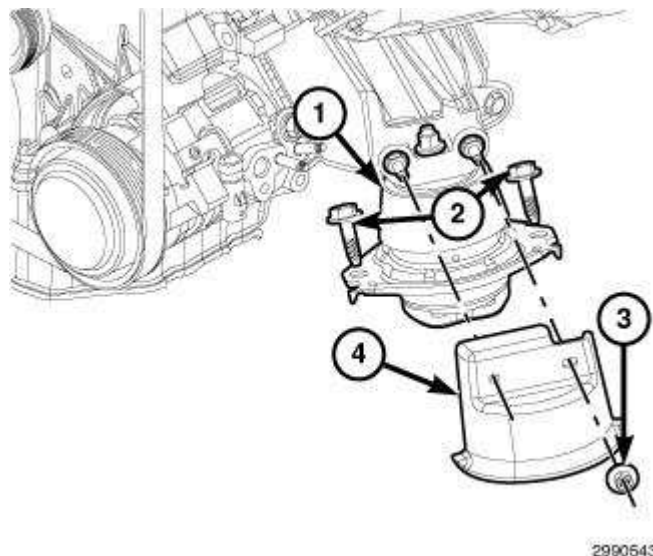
Engine Mount Heat Shield Retaining Nuts, Lower Mount Retaining Bolts & Heat Shields
